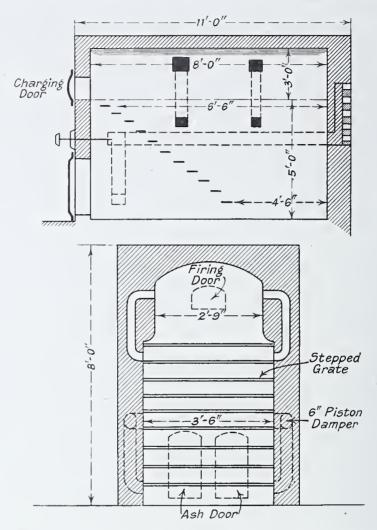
Wood Refuse Furnace for Boiler Plate Heating (Vancouver, B.C.).
